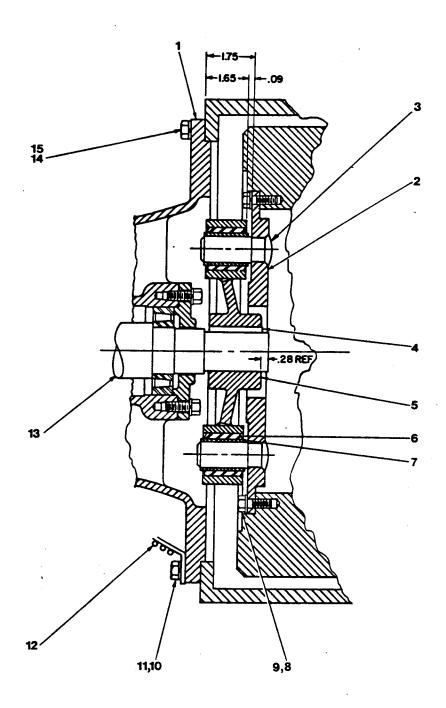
Drive Assembly For Pump Model 16A2-HL3
